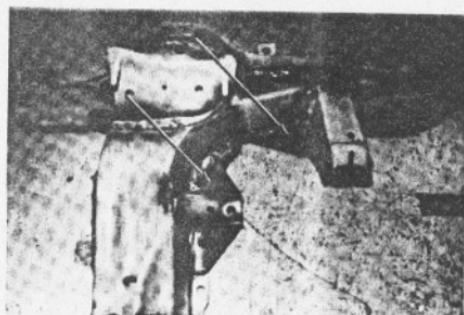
Weld gussets to crossmembers and lower control arm bracket.
